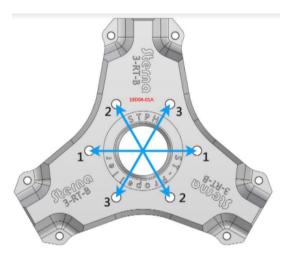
Use "Star Pattern" for tightening engine flange bolts.
